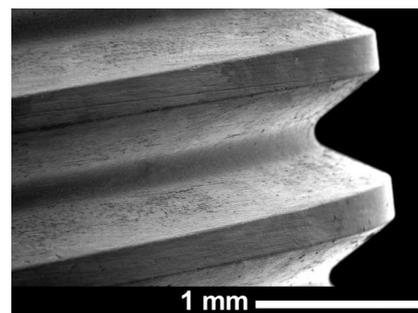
Machining of the thread of a tensile test specimen (Nb-silicide alloy).
